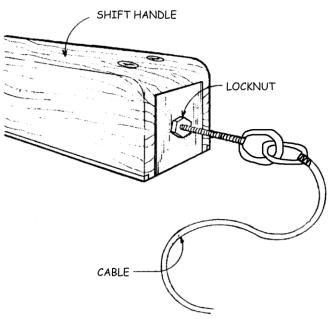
4-box Flyshuttle Beater Shift Handle
